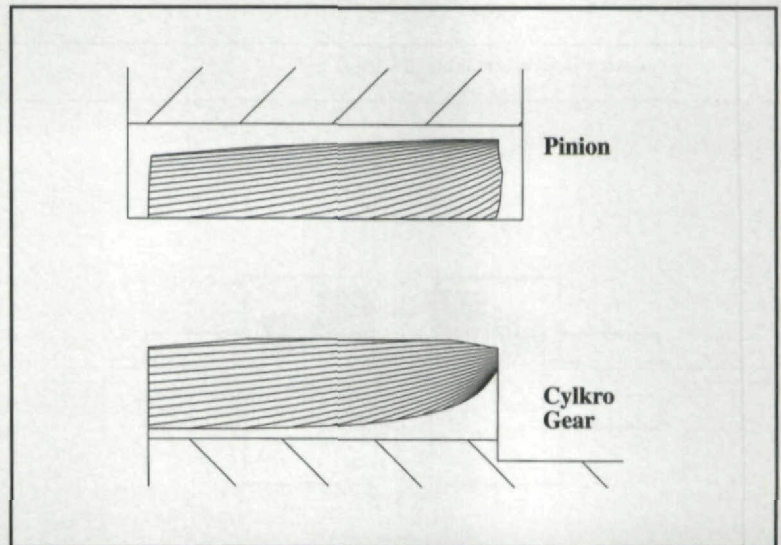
Lines of contact at the pinion and the Cylkro gear flank.
